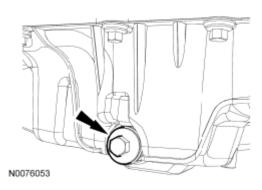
Locating Drain Plug Courtesy of FORD MOTOR CO.
